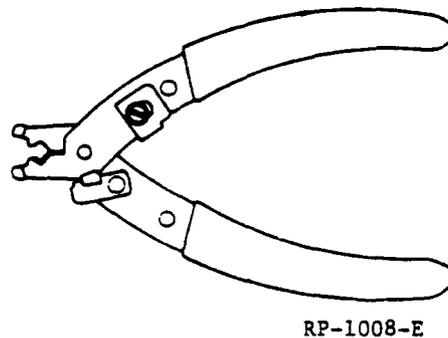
WIRE SKINNING TOOL R-3088 (PAR. 7.21)
